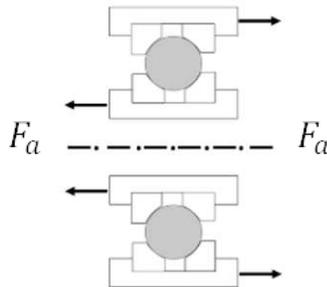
Bearing cross section under axial load  $F_a$  with loaded bearing rings
